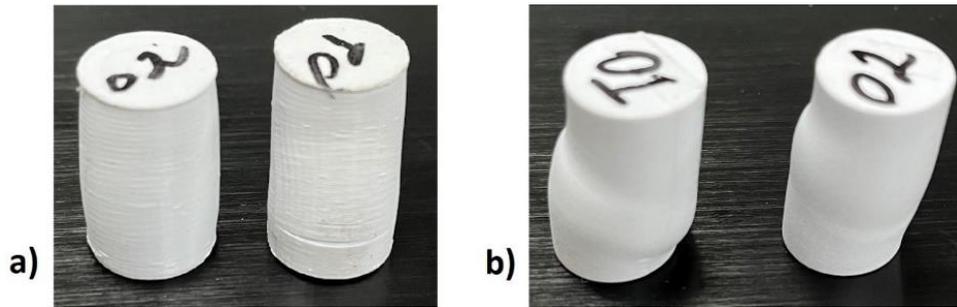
a) 3D printed compression sample after the test; b) Injected compression sample after the test.
